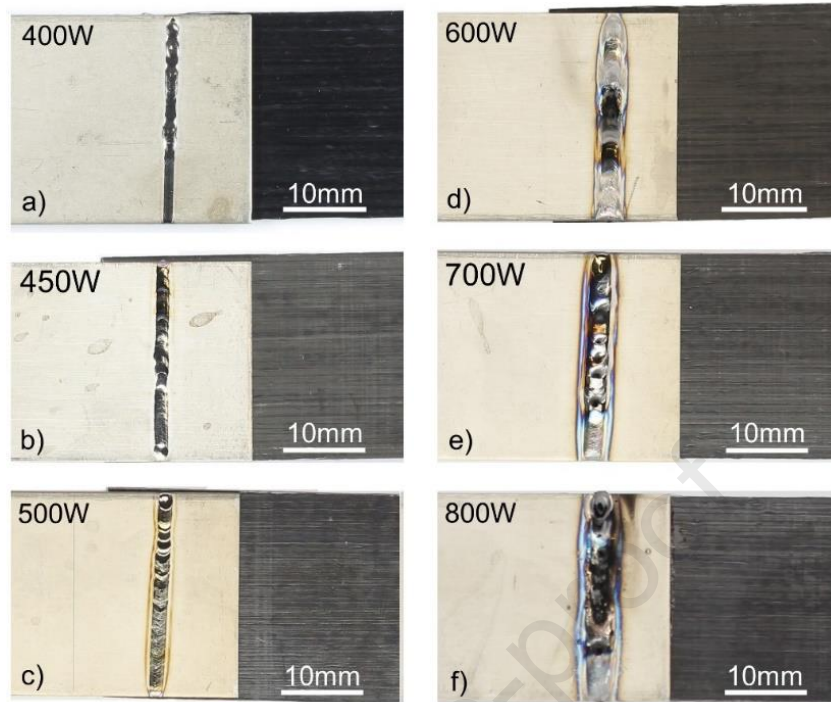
Surface of the CF/PEEK-Ti joints after laser joining with the examined laser powers.
